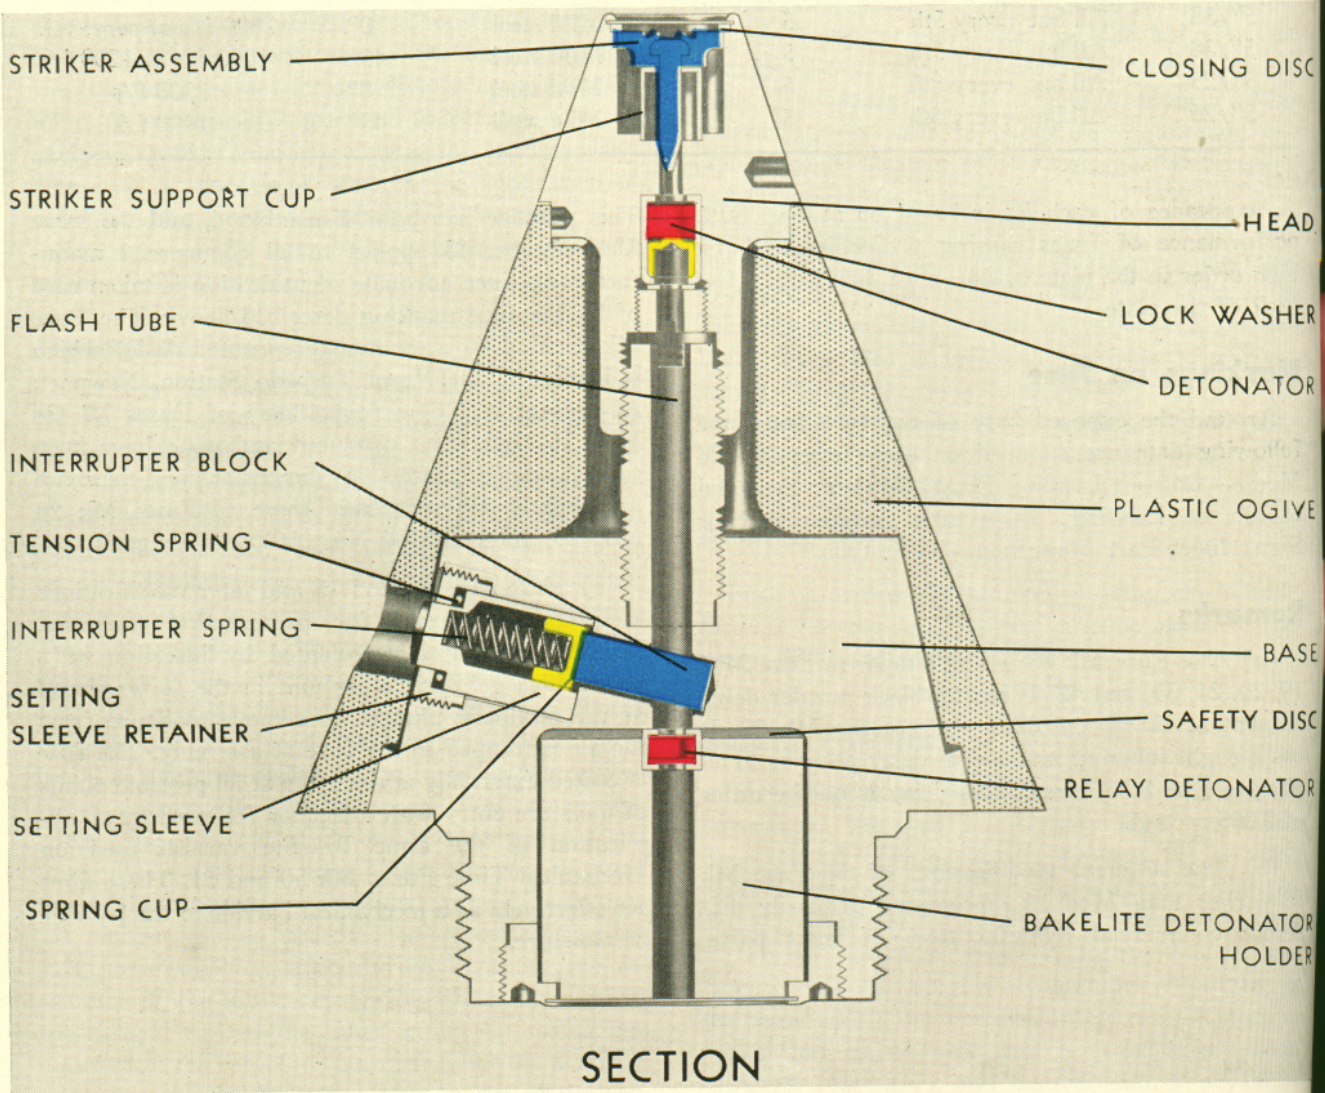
Point Detonating Fuze Mk 29—Sectional View
